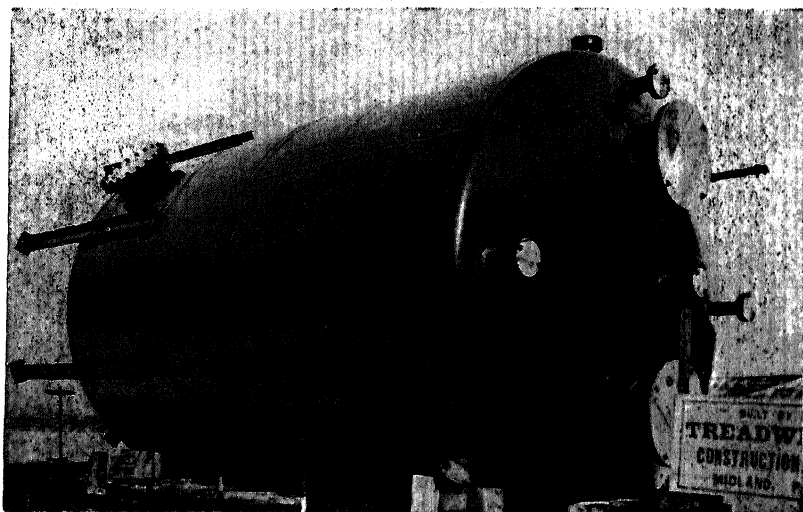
Lead lined welded steel tank 10 ft. 6 in. diameter, 20 ft. 10 in. long. For use by a large chemical manufacturer.
